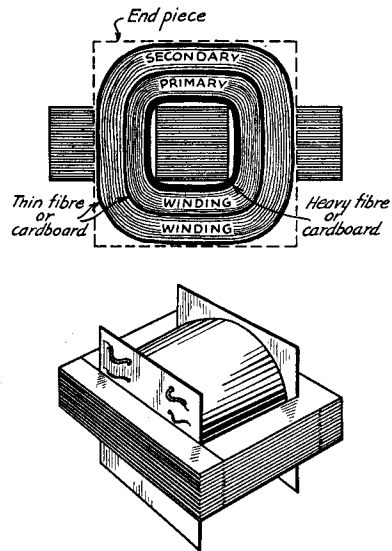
A CONVENIENT METHOD OF ASSEMBLING THE WINDINGS ON A SHELL TYPE CORE
